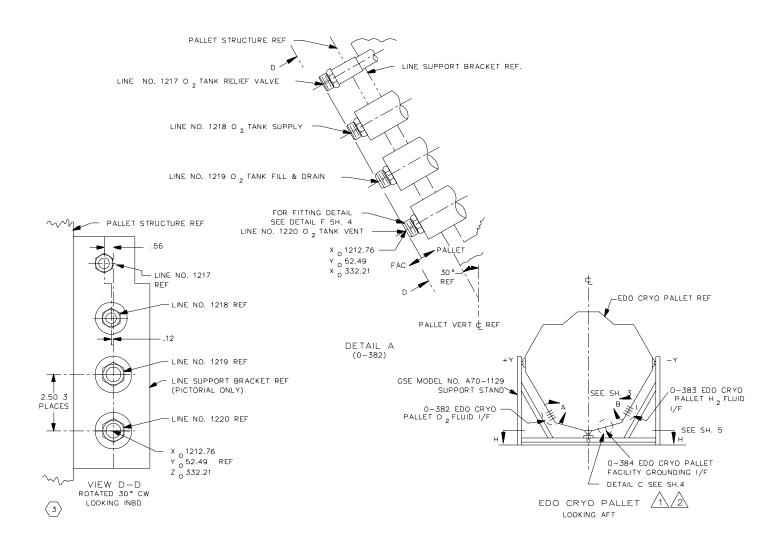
EDO CRYO PALLET MAIN VIEW & O2 DETAILS
